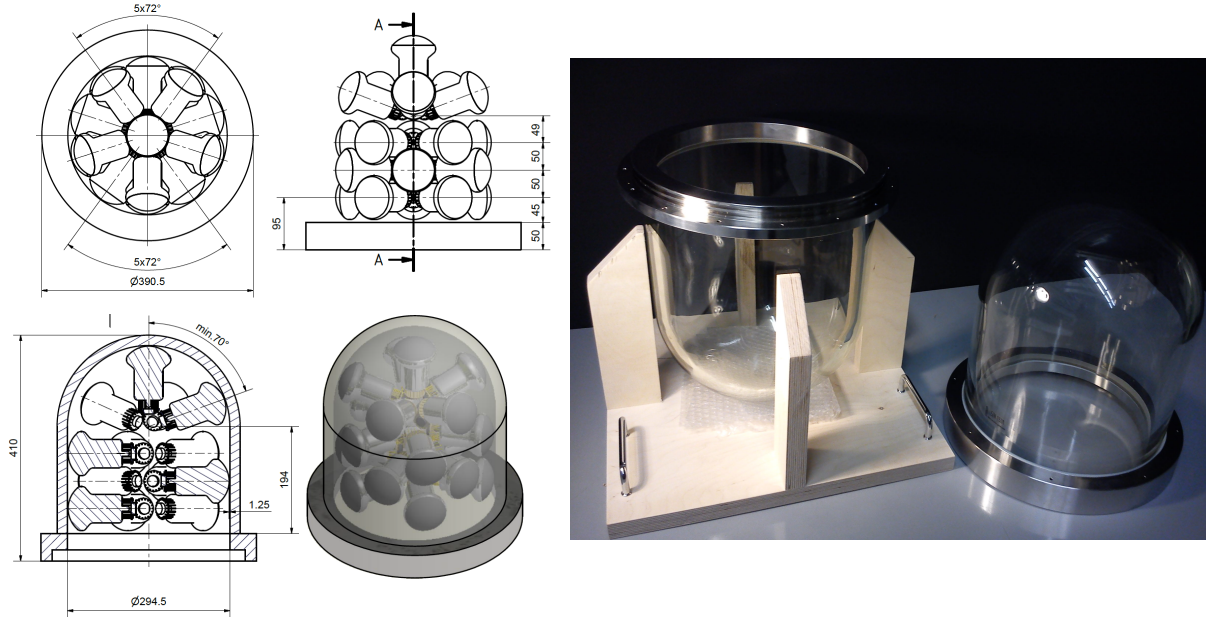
Left: Technical drawing of the current layout for the PINGU multi-PMT optical module. Dimensions given in mm. Right: Borosilicate vessel components available at Erlangen.
